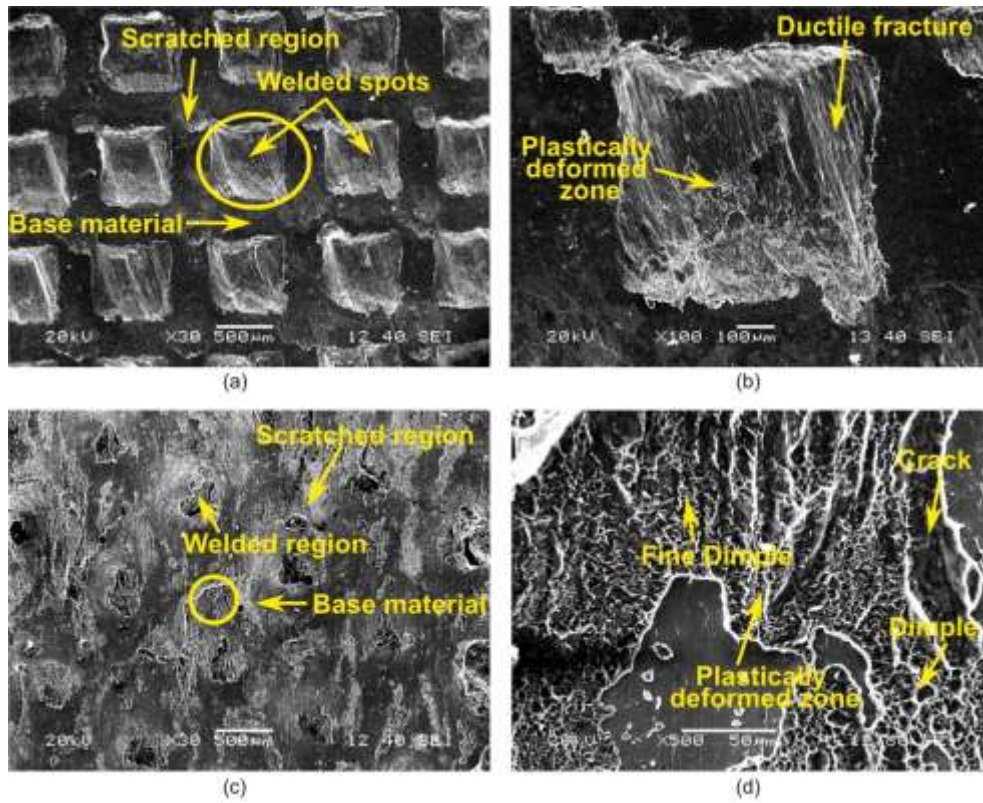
Fractured surfaces of ultrasonic welded specimens in normal surface condition (a) Al side surface with 30X zoom; (b) Magnified image of a; (c) SS side surface with 30X zoom; (d) Magnified image of c
